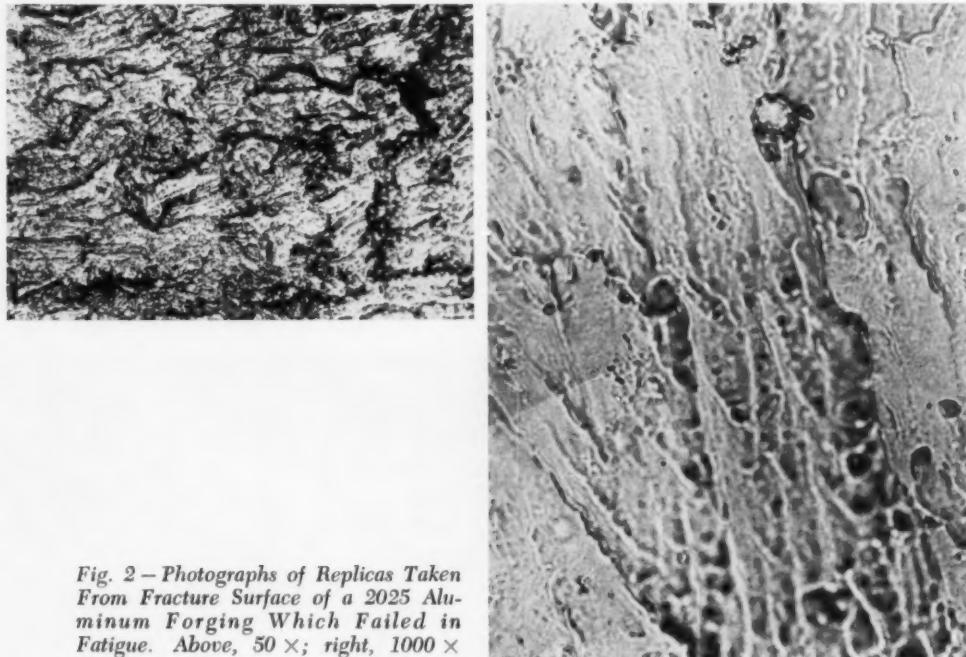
Photographs of Replicas Taken From Fracture Surface of a 2025 Aluminum Forging Which Failed in Fatigue. Above, 50 X; right, 1000 X
